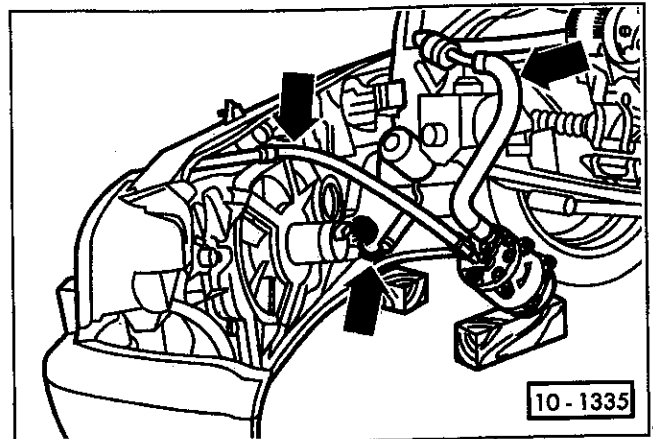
A/C compressor shown removed from engine and supported. Do not stress or kink refrigerant lines (arrows).
